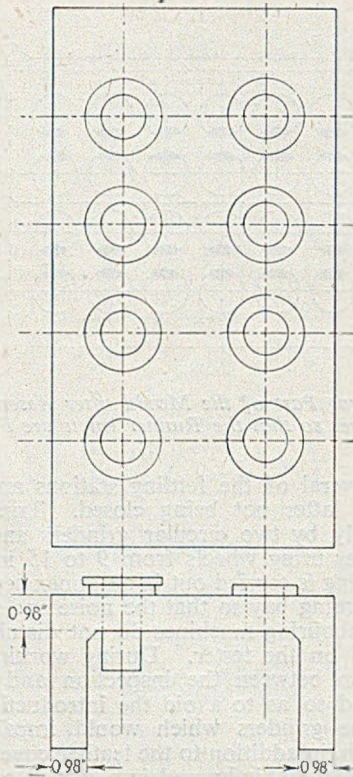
Jig for Breaking-off the Heat-conservation Collars, showing one Tappet Casting in Position.
